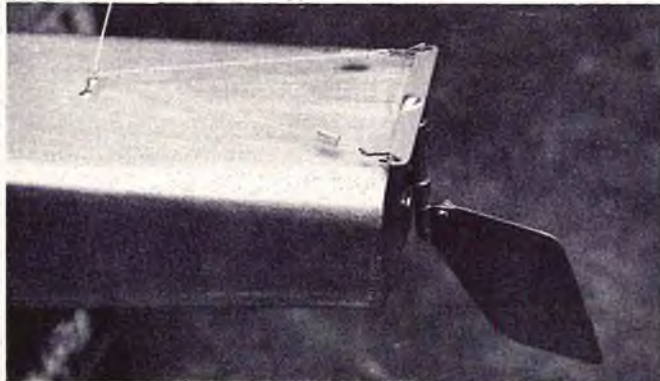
Mount steerable rudder to left float. Bent pin hooks allow easy removal of monofilament control cables. Cables run from water rudder through wire "U's" to aircraft rudder.
